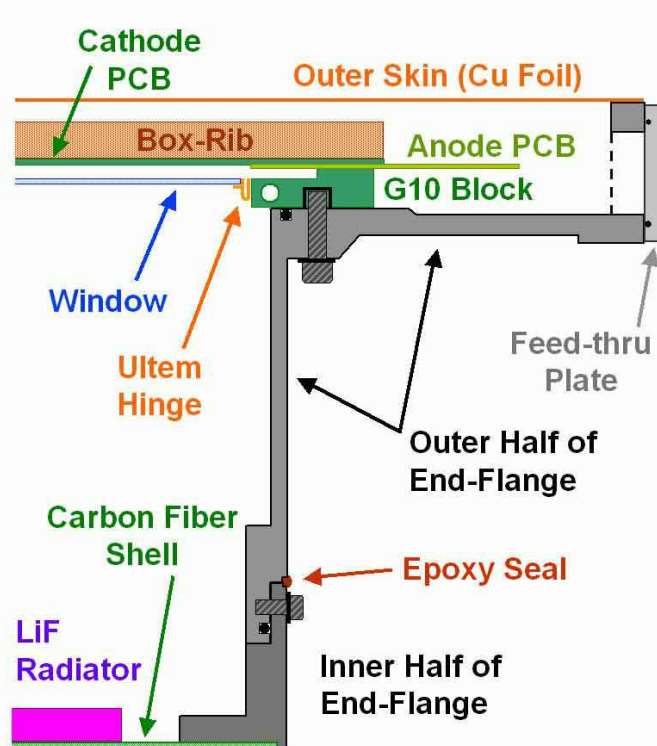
Cross-sectional view of one end of the RICH detector, showing end flange construction.
